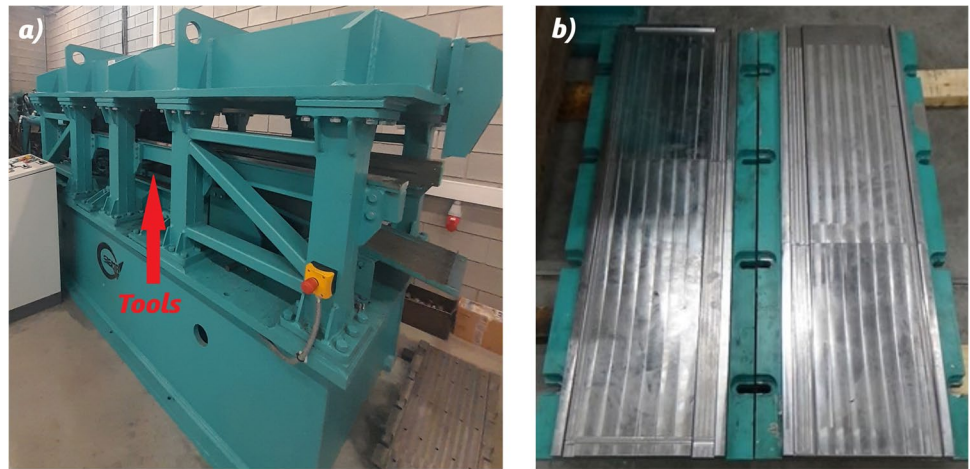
Test stand: a laboratory cross and wedge rolling mill, b tools used for tests
